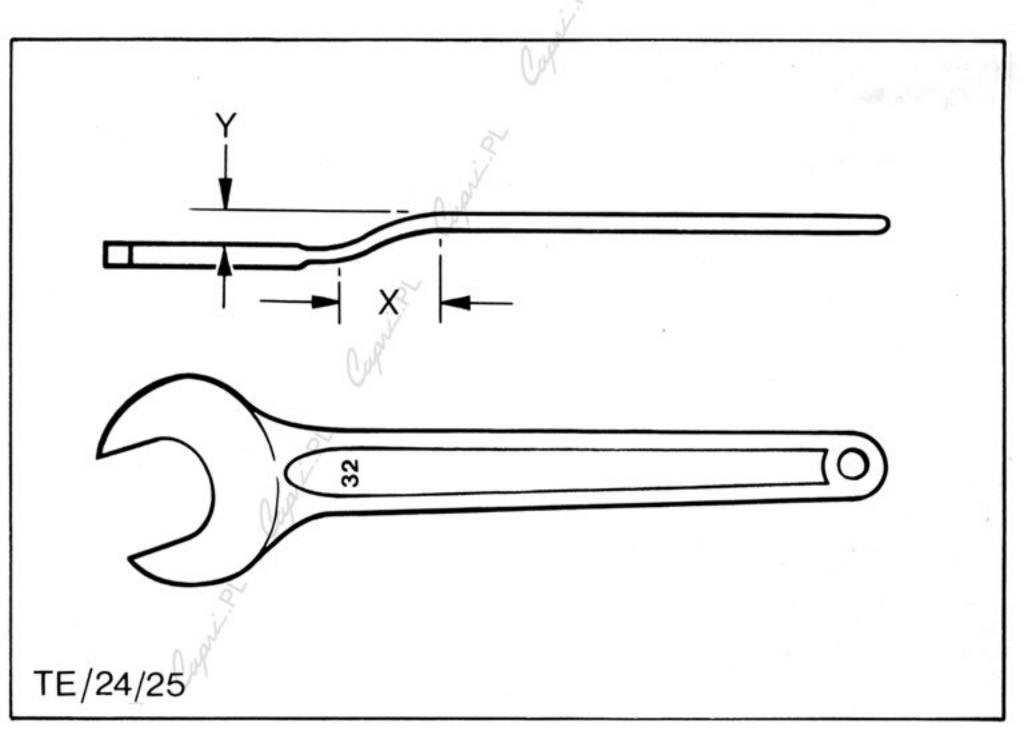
Dimensions showing modifications to be made to 32 mm (1,25 in AF) spanner. X = 25 mm (1.0 in)
